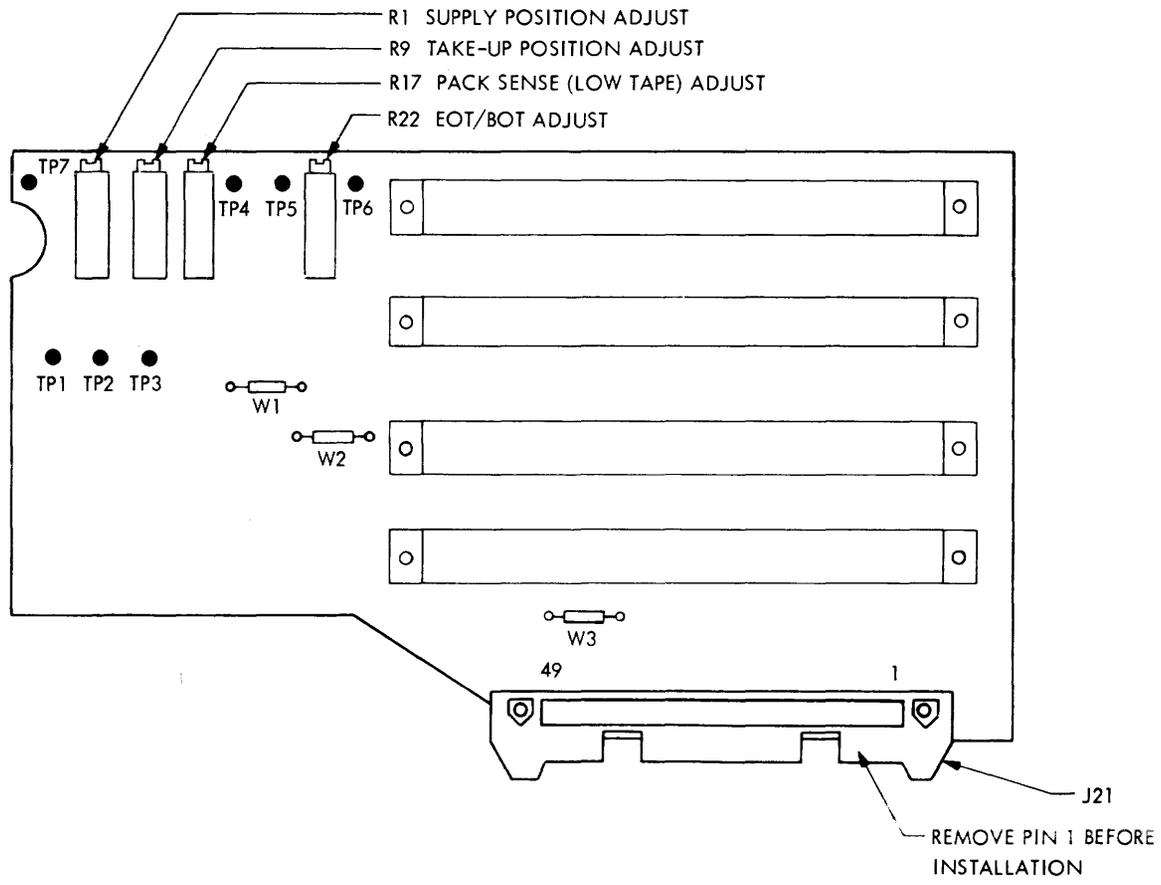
Capstan/Regulator PCBA Adjustments and Test Points
